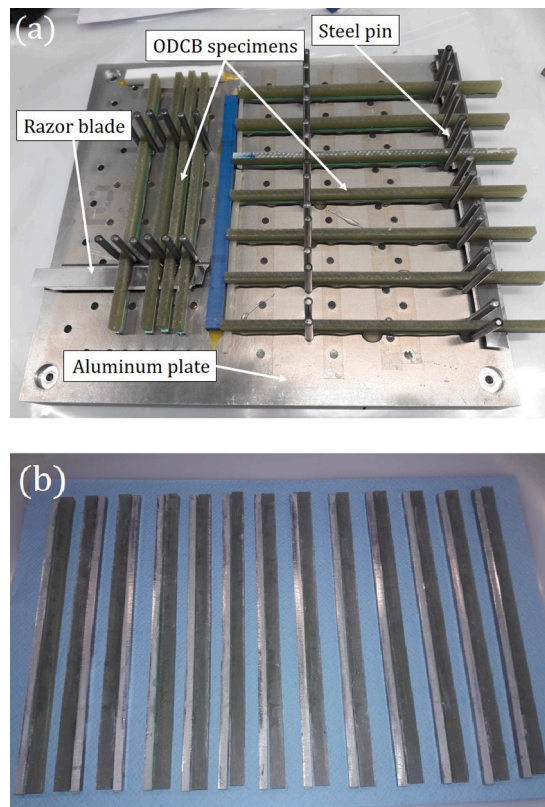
ODCB specimens in aluminium mould (a) and after curing (b).
